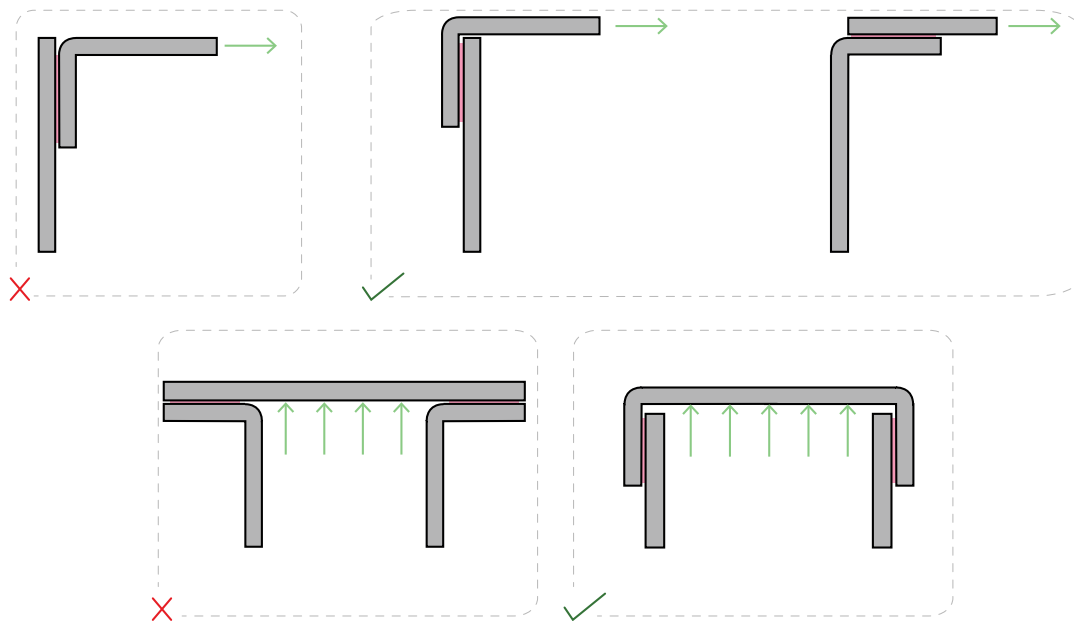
Schemes illustrating good and bad joint designs [3].
